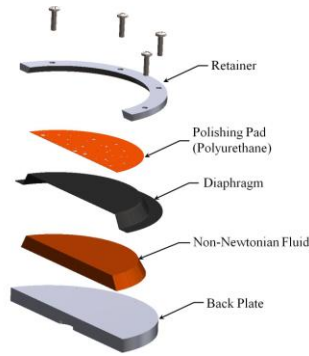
3D RC lap structure (exploded and cut in half) [18].
